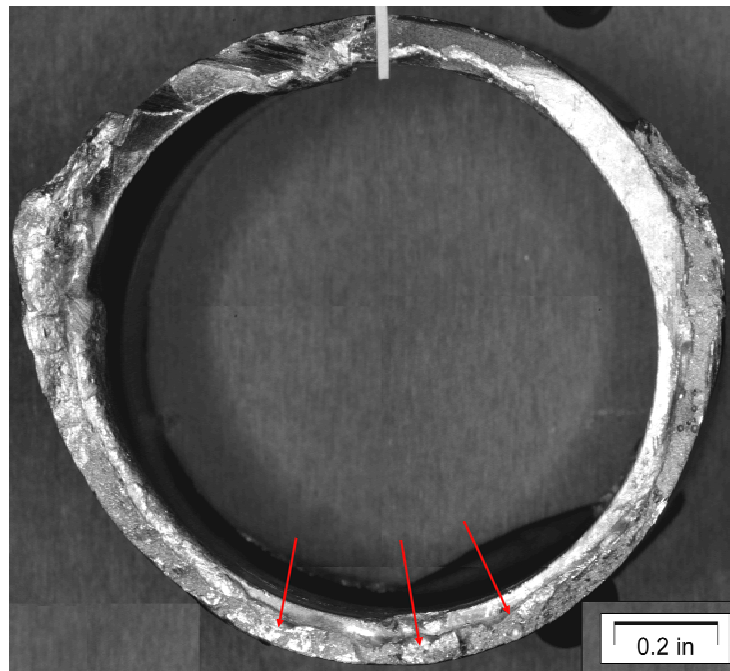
Montage of the fracture surface of the pilot cyclic stick.
